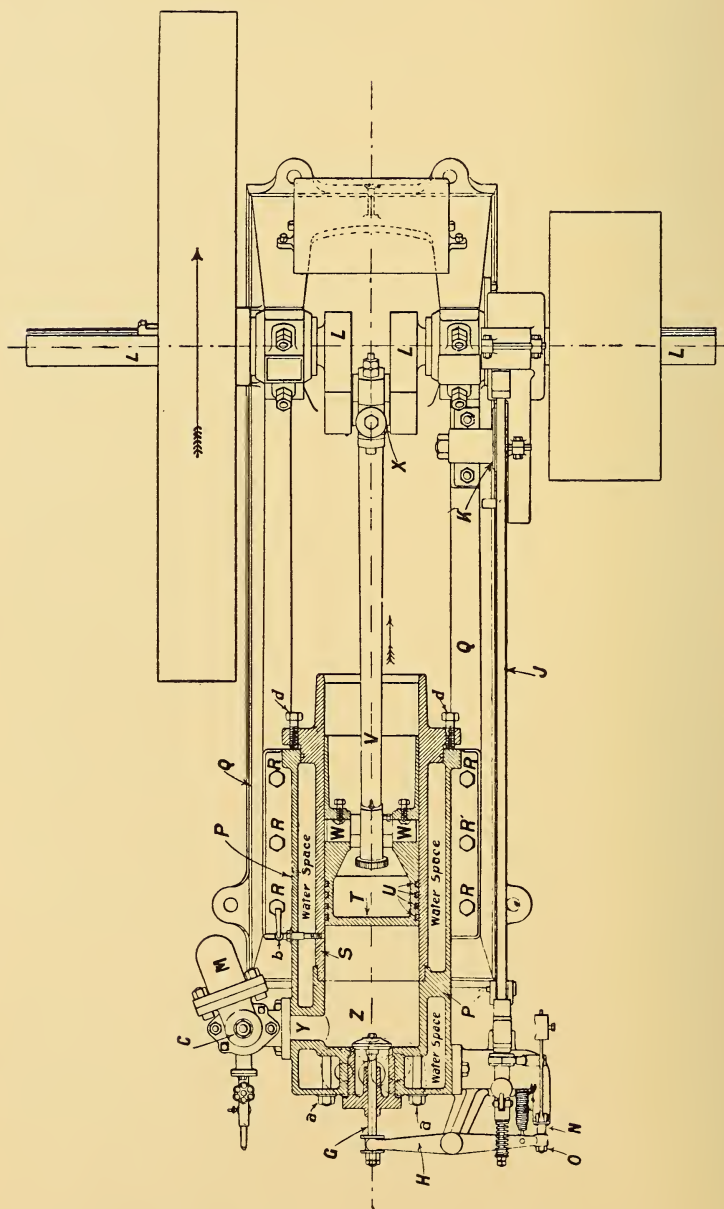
Sectional Plan through cylinder of Campbell Oil Engine.
